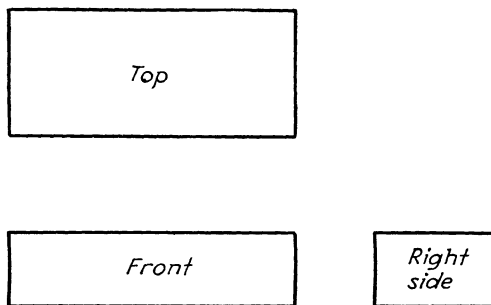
Orthographic projection of the object in FIG. 12. The standard method of making mechanical drawings.
